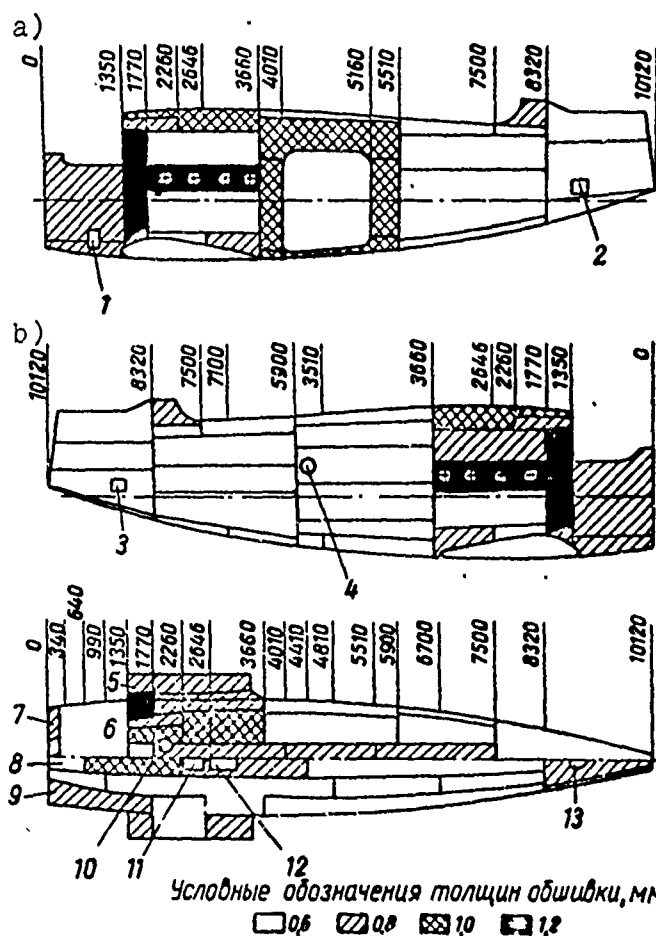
Diagram of the fuselage skin: a) view of left side; b) view of right side; 1 - hatch for access to fuel drain cock; 2 - cutout for battery container; 3 - cutout for tail wheel opening; 4 - cutout for window; 5 - wing center section fillet; 6 - cutout for canopy; 7 - top view; 8 - cutout for oil cooler; 9 - bottom view; 10 - cutout under hatch; 11 - cutout for frame-work of MRP-48; 12 - cutout for UZ-1A hatch; 13 - cutout for tail wheel.
